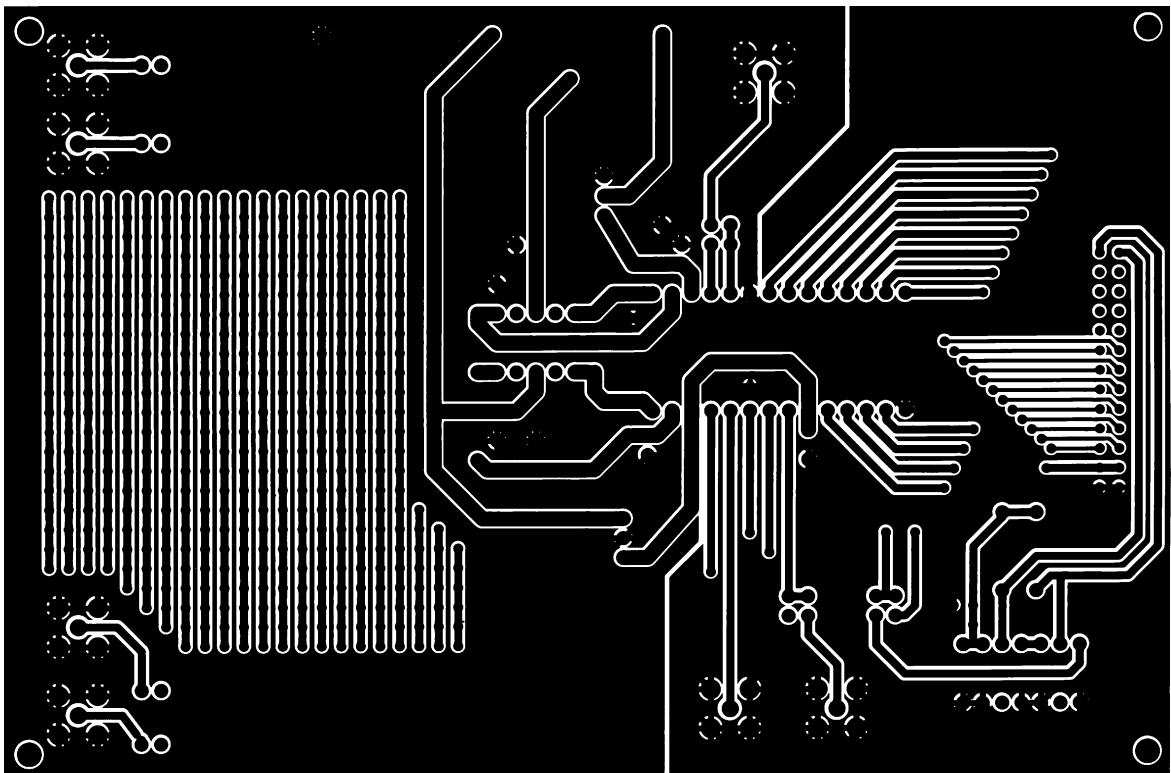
PCB Solder Side Layout for the Circuit of Figure 20
